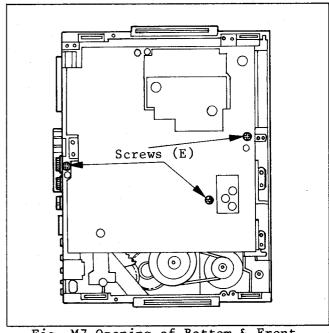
Opening of Bottom & Front P.C. Boards-(1)
